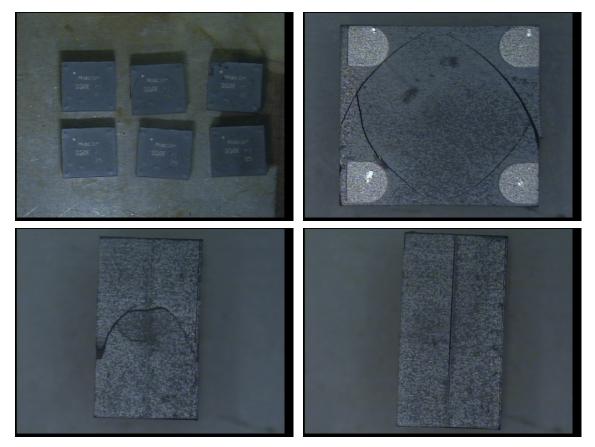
Thicker D50E dielectric ring coil transformer pictures showing cracks.
